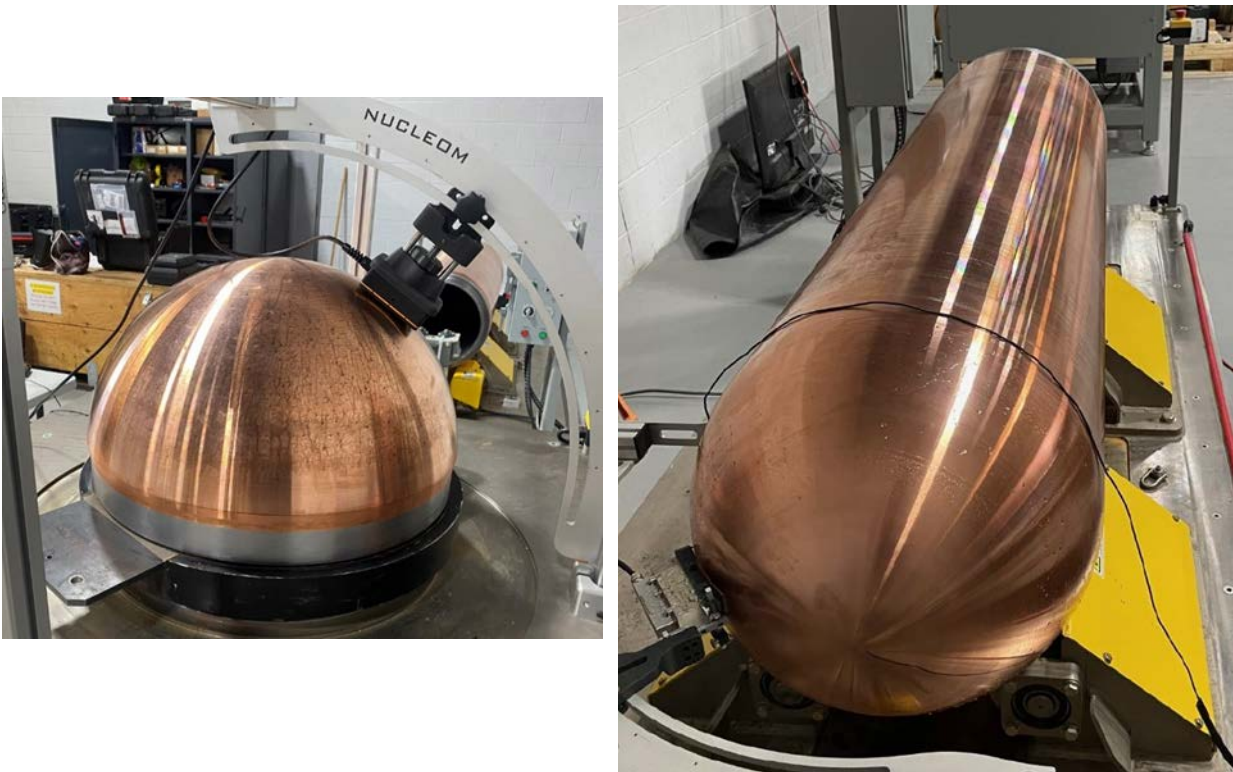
Non-Destructive Examination of Mark II UFC Hemi-head (left) and Lower Assembly (right) components copper coated by BEP Surface Technologies, Inc.
